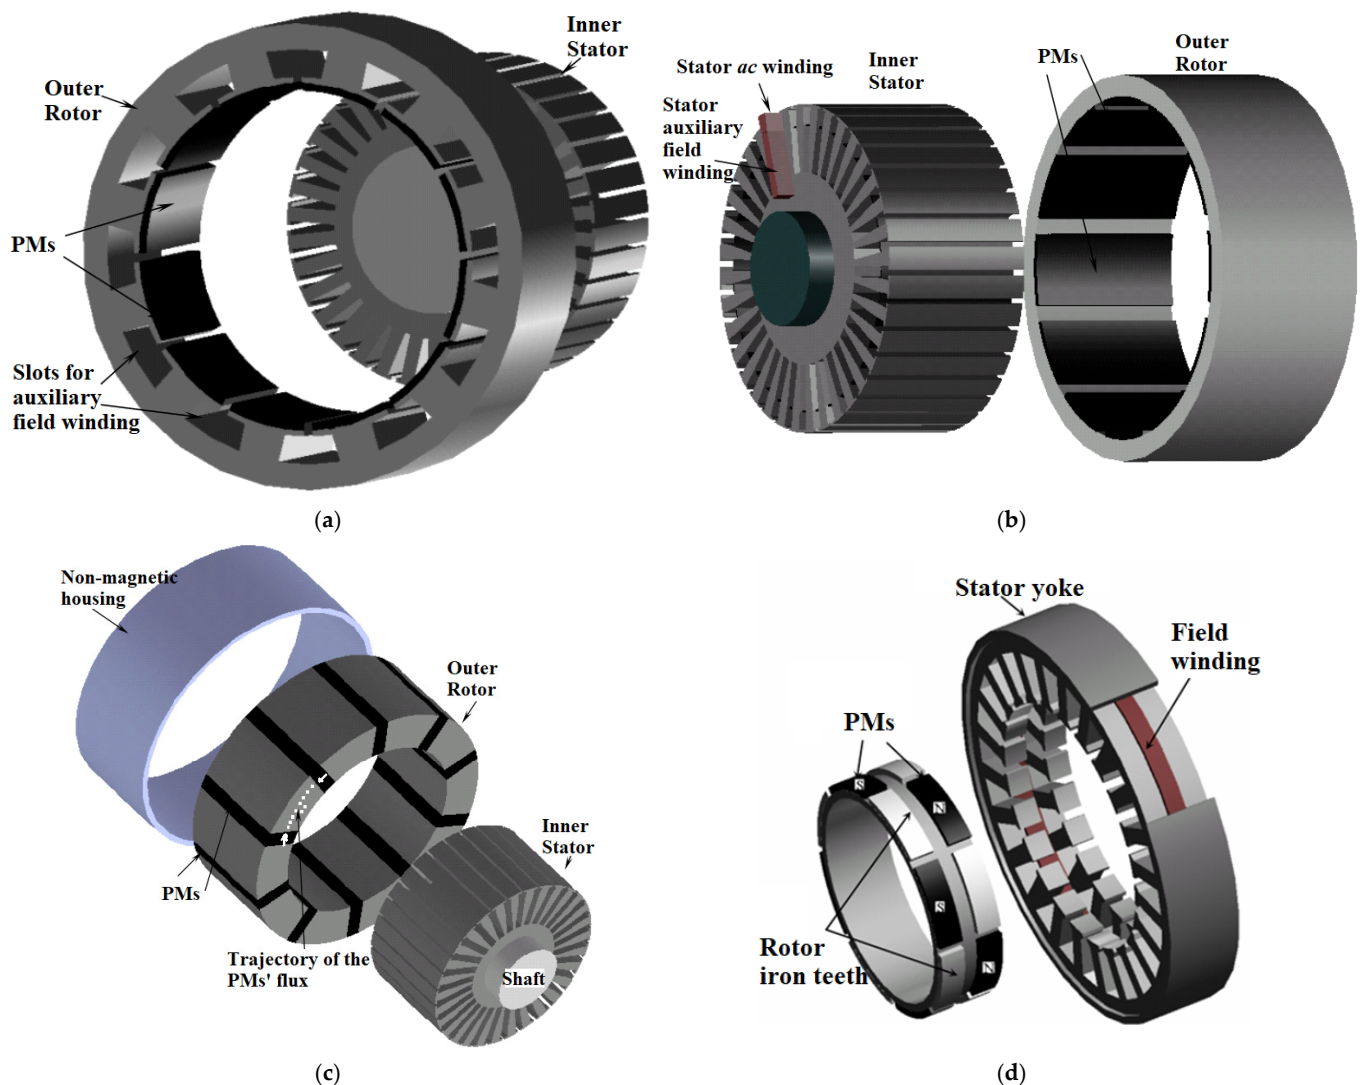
DESG studied variants: (a) with auxiliary field winding on rotor core (DESG1); (b) with auxiliary field winding on stator core, and surface mounted magnets (DESG2); (c) with auxiliary field winding on the stator armature and spoke rotor variant (DESG3); (d) with homopolar auxiliary winding placed on stator armature (DESG4).
